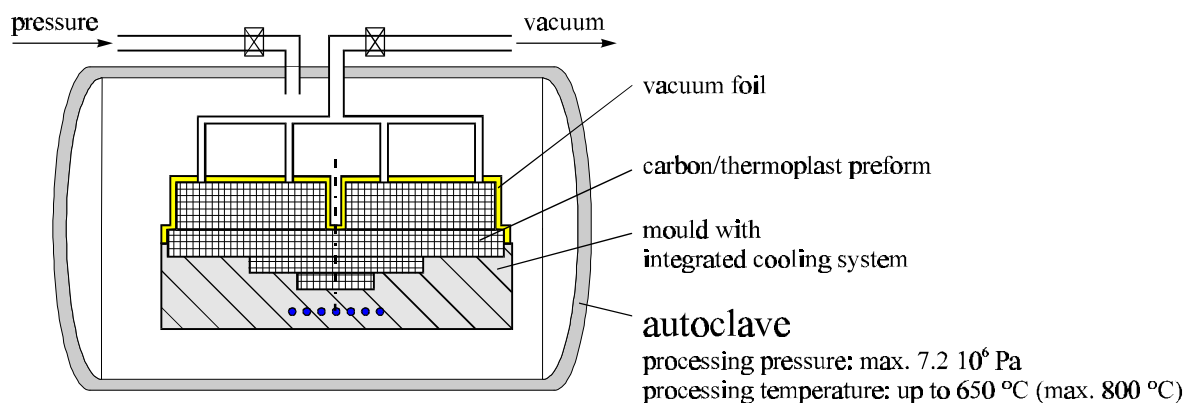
Principal sketch of ILK high-temperature autoclave with exemplary mould
